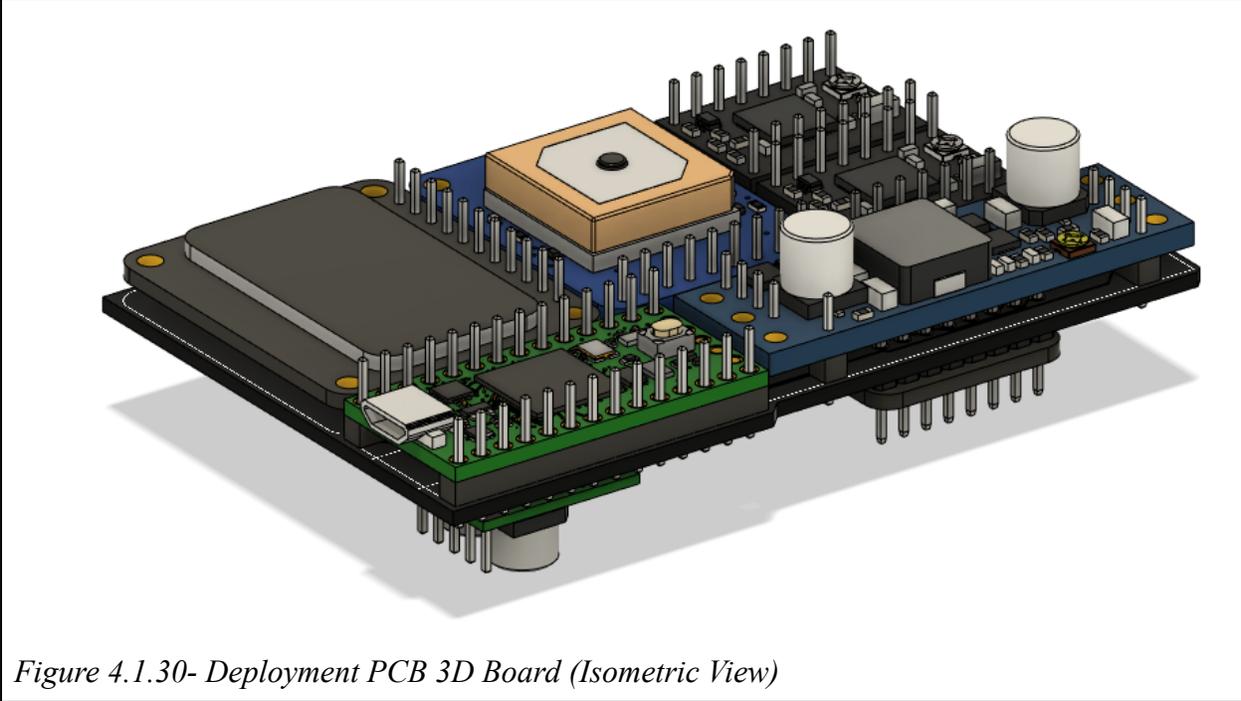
Deployment PCB 3D Board (Isometric View)
